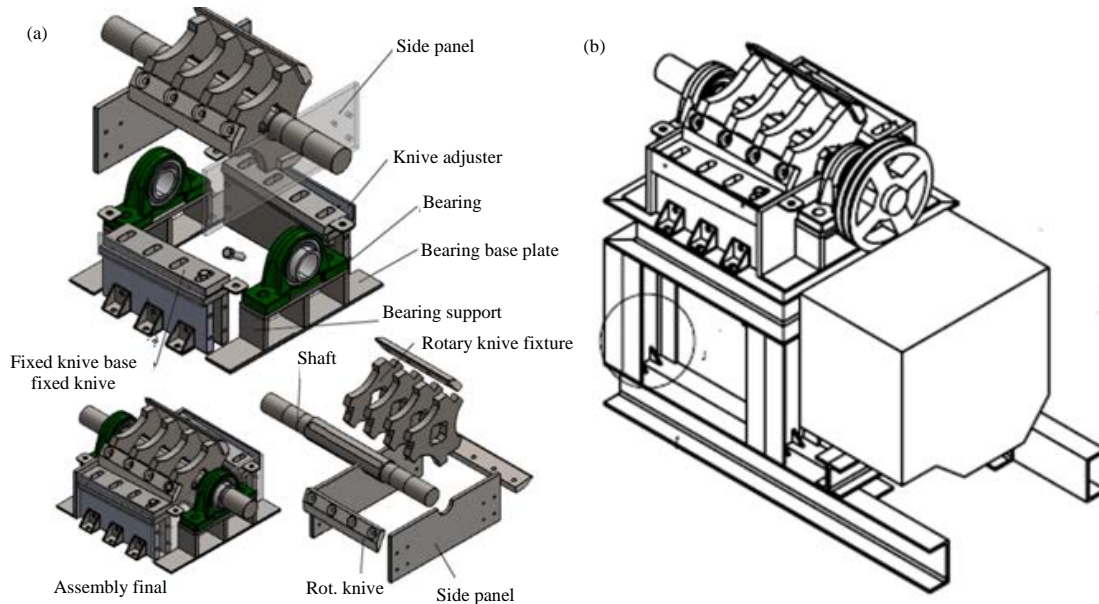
(a, b): (a) Design of the main body and (b) Design of the machine as a whole
